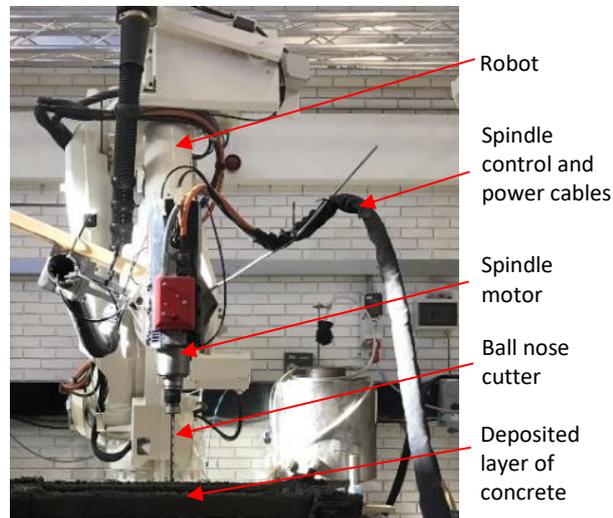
Photograph of the Hybrid 3DCP robot in milling mode.
